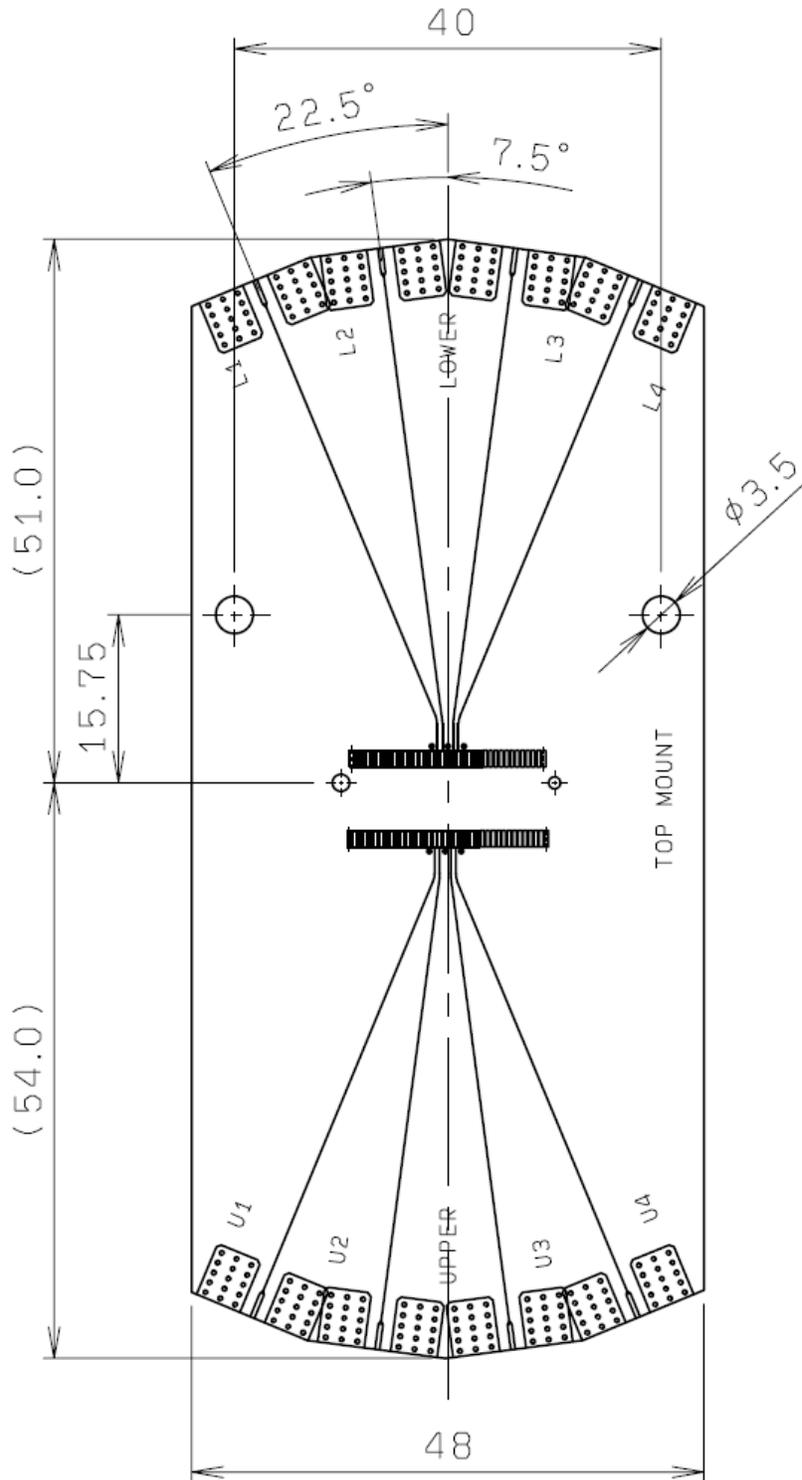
Top Mount Motherboard Test Fixture PCB
